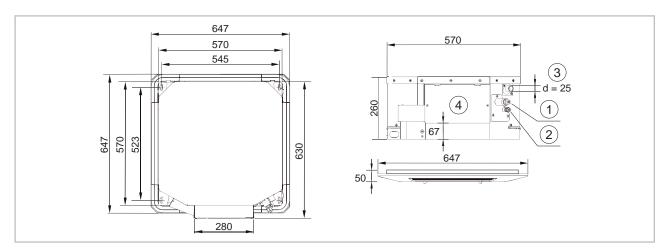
Dimensions MVD 222-452 (all measurements in mm)
